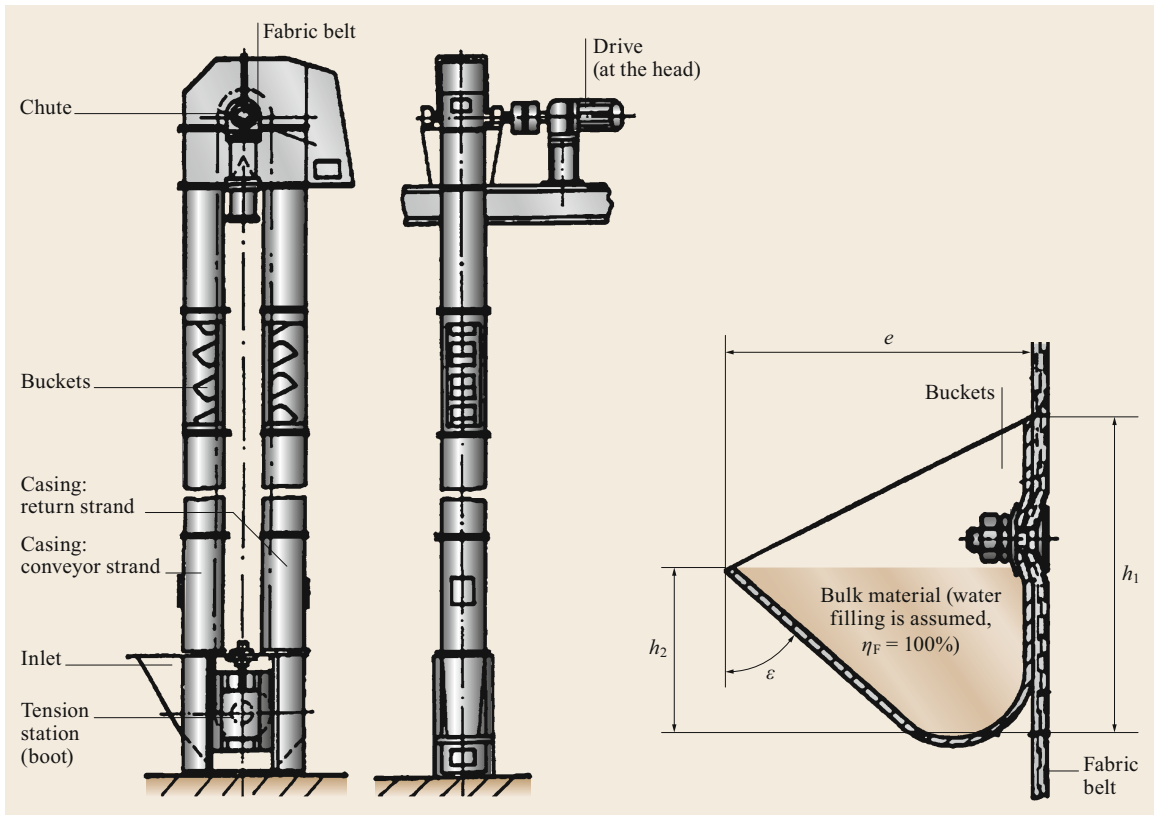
Belt bucket elevator, e projection, ε bucket opening angle, h_1 , h_2 bucket heights
